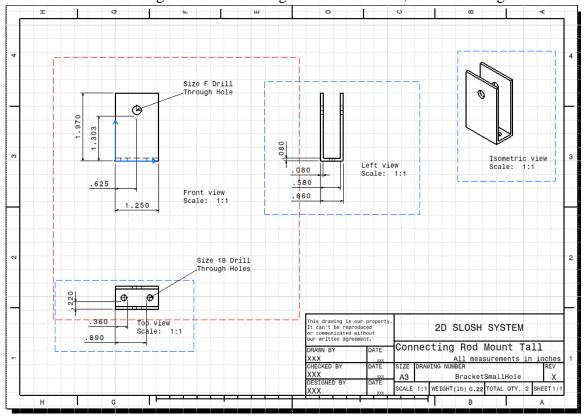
Connecting Rod Mount Tall, Catia Drawing
